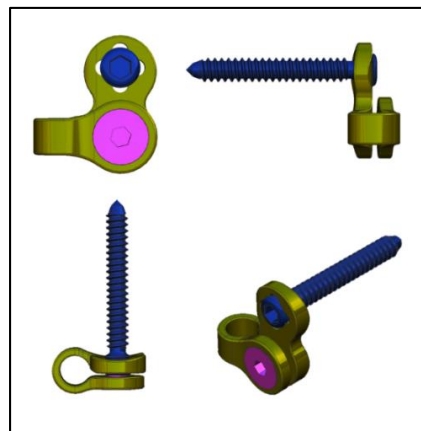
Different views of final version of the proposed system (upper-left: top view, upper-right: left view, below -left: front view, below-right: trimetric view).
